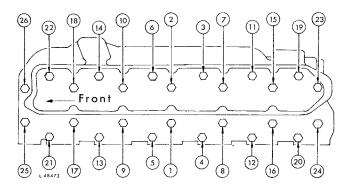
Correct Sequence for Tightening Cylinder Head Cap Screws
